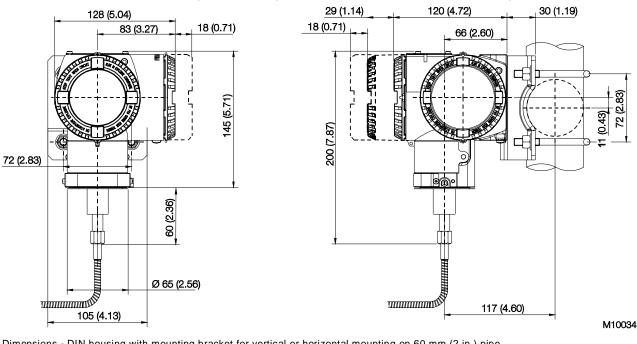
Dimensions - DIN housing with mounting bracket for vertical or horizontal mounting on 60 mm (2 in.) pipe
